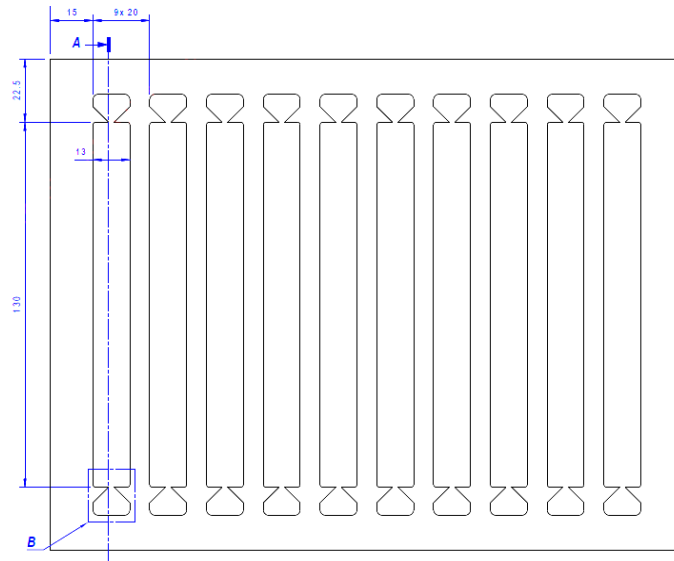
Teflon made Vertical burning test (UL-94V) specimen mold.
